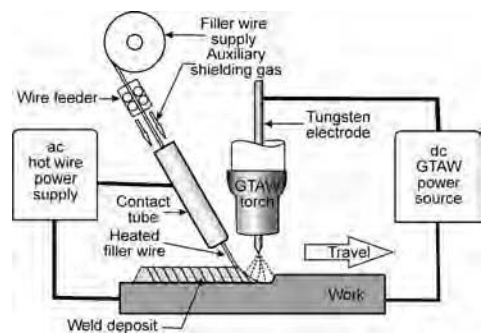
Schematic of gas tungsten arc welding (GTAW) with hot wire feed. ac, alternating current; dc, direct current
